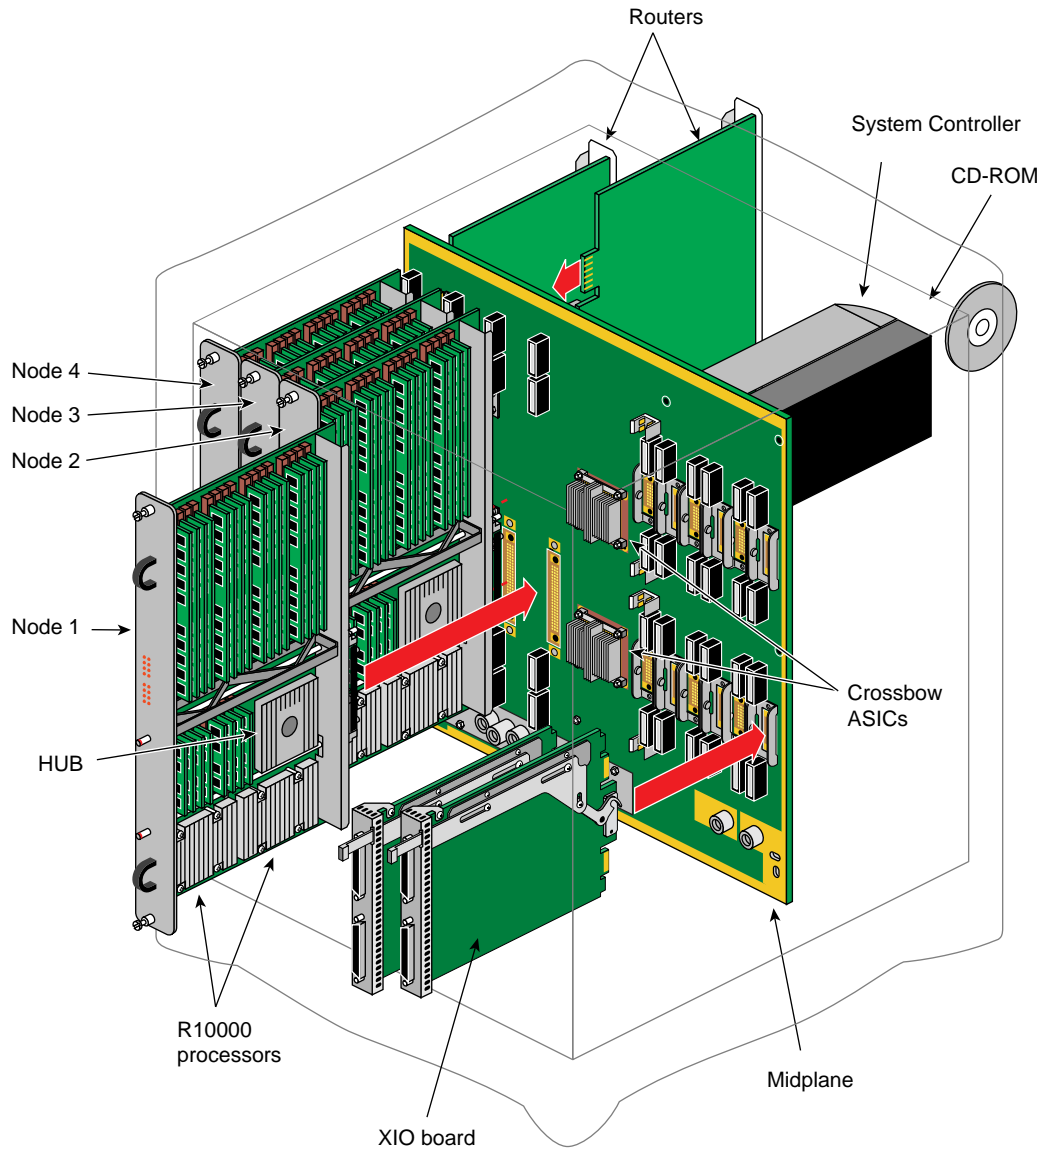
Origin2000 Deskside Front and Rear (Partial Exploded View)
